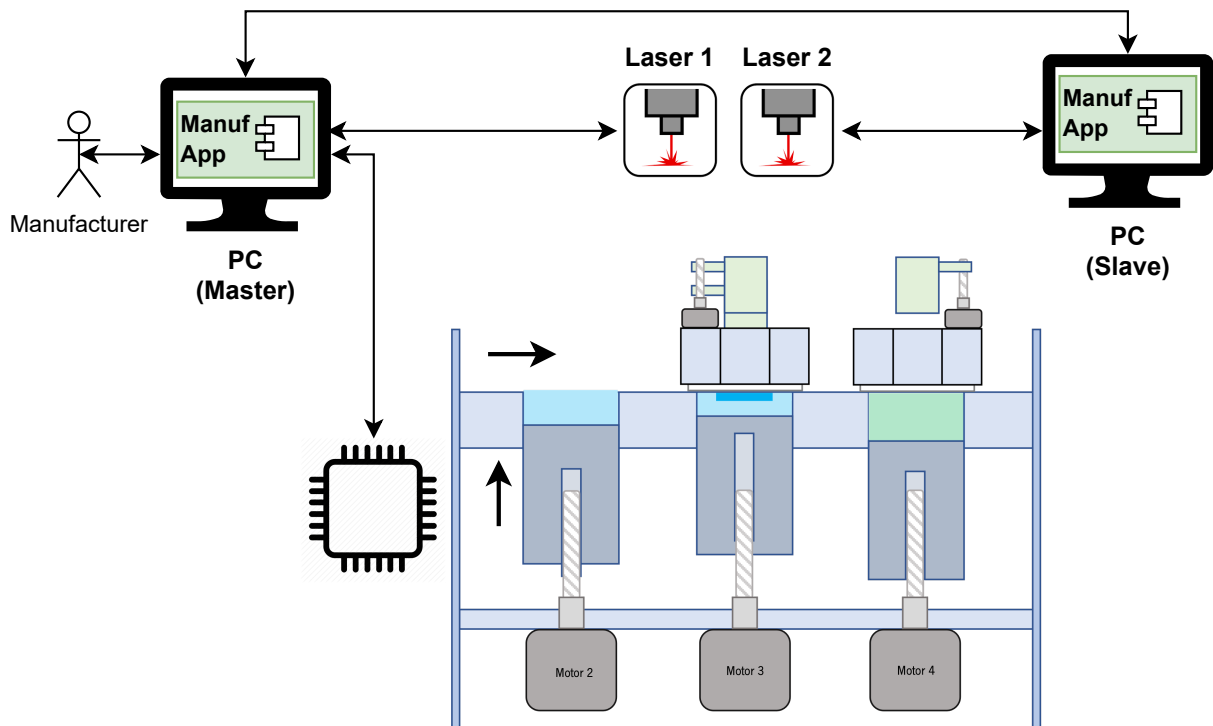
Working principle of the 3DMMLPBF machine: powder recoating
